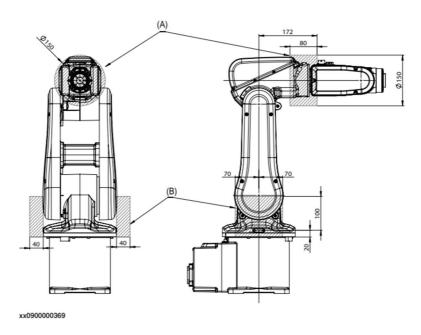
Diagram indicating safe mounting zones on robot arm [13].
